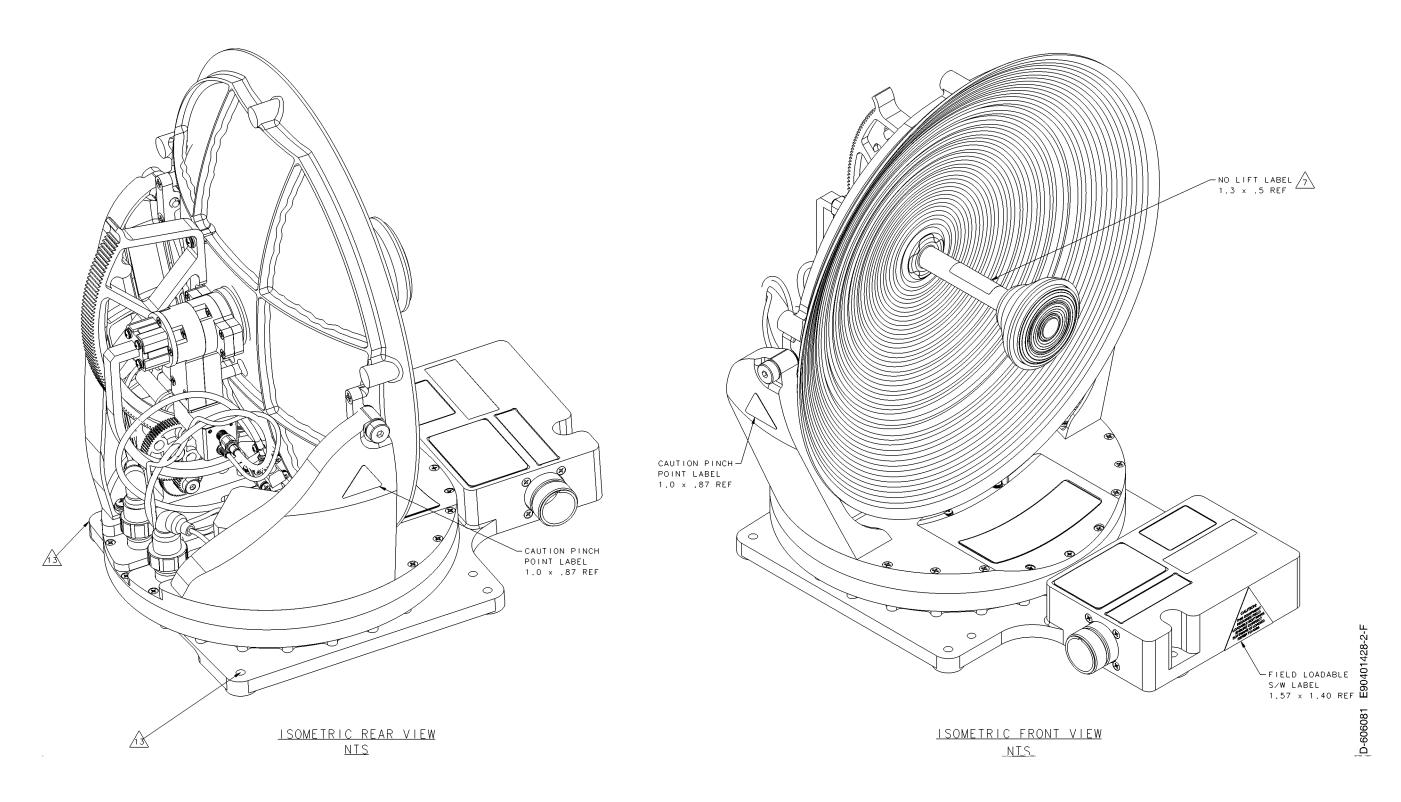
(Sheet 2 of 4) TMA Outline and Installation Drawing (90401428, REV F)
